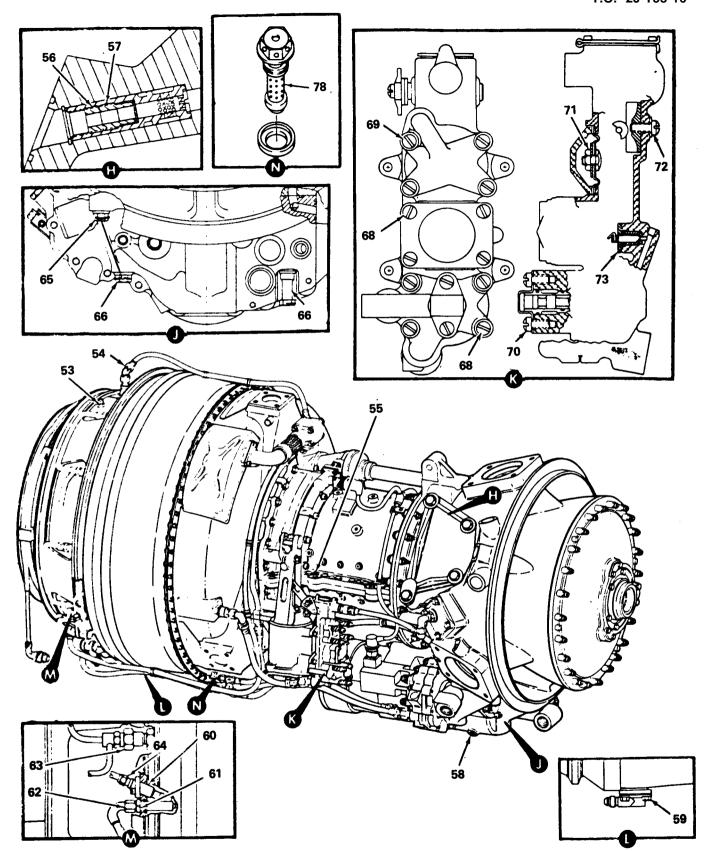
Special Torque Value Locations (T53-L-11 Series Engines) (Sheet 6 of 6)
